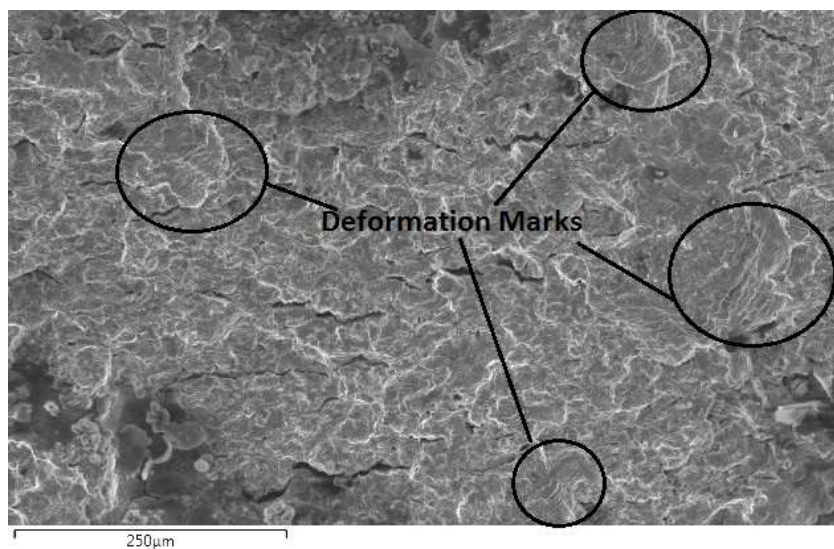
Deformation marks showing plastic deformation before fracture indicating a ductile fracture in a non-clad fatigue sample
